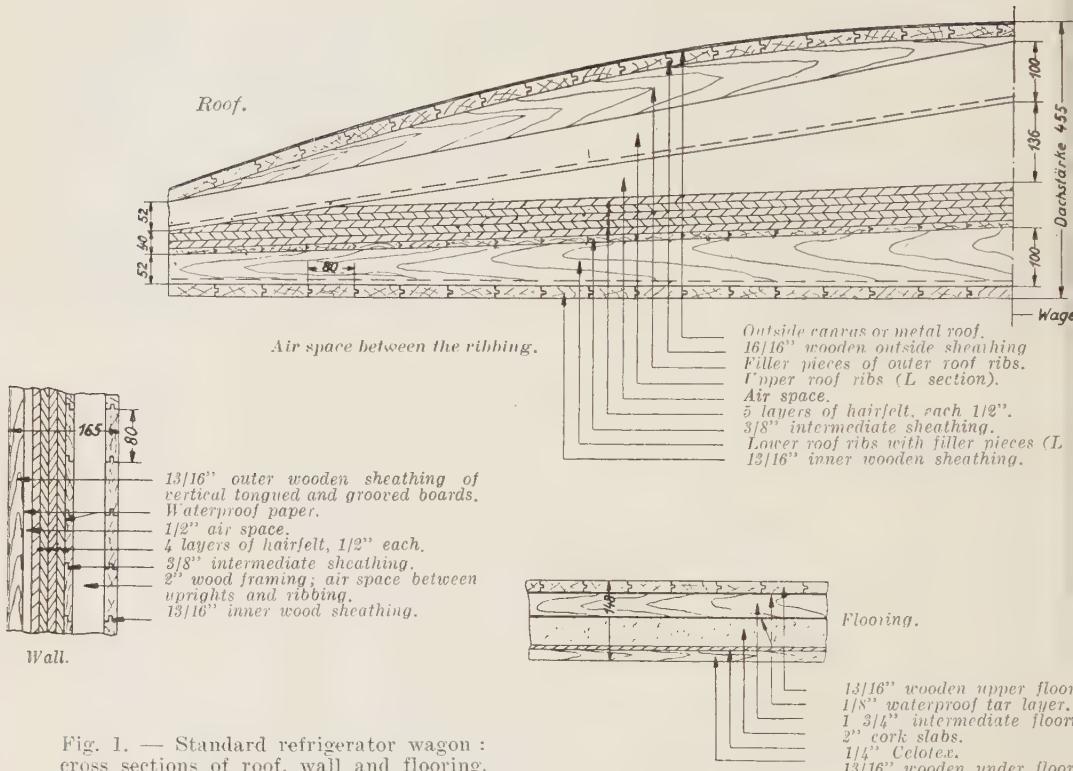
Standard refrigerator wagon : cross sections of roof, wall and flooring.
